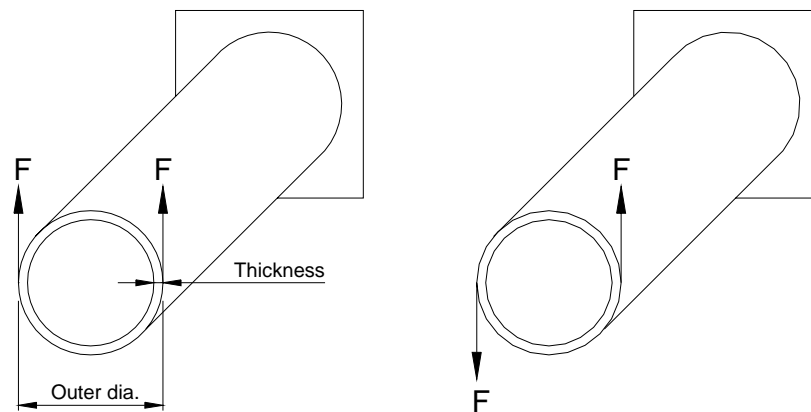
Cantilever tube with bending load and torsional load
